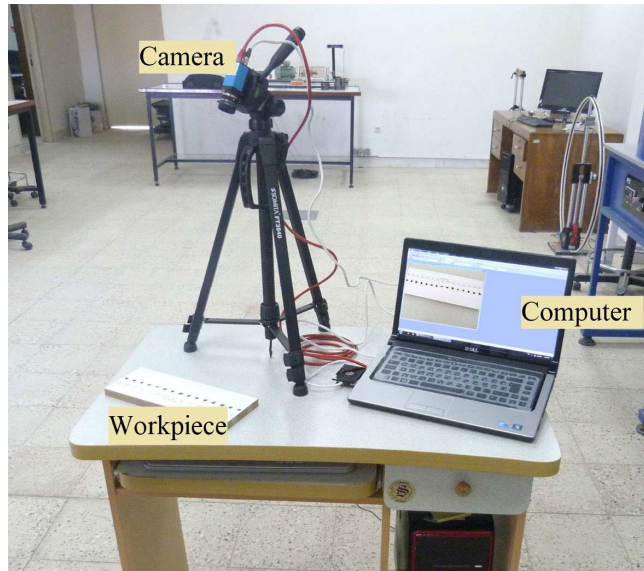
Measuring the drilled holes dimensions by replacement of the calibration plane with the drilled MDF panel.
